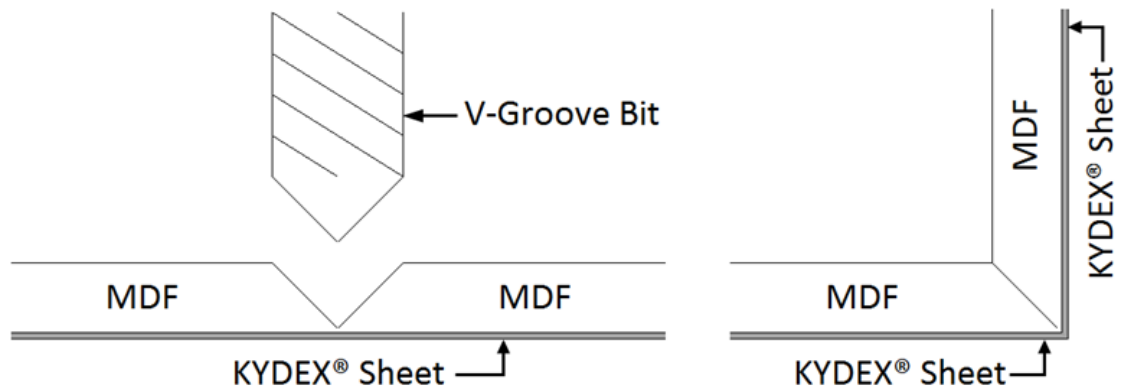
Miter Folded KYDEX® Sheet and MDF Panel
